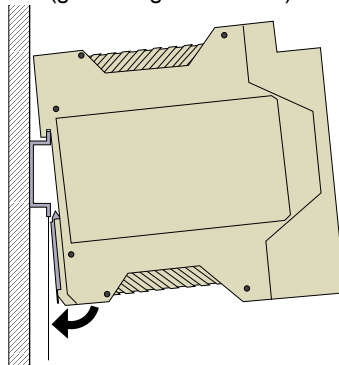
Attaching the mGuard industrial rs to a mounting rail
